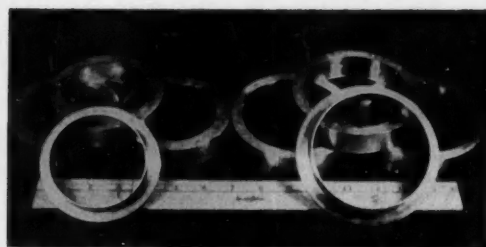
Typical ring sections machined from centrifugally cast 16-ft-long tubes
